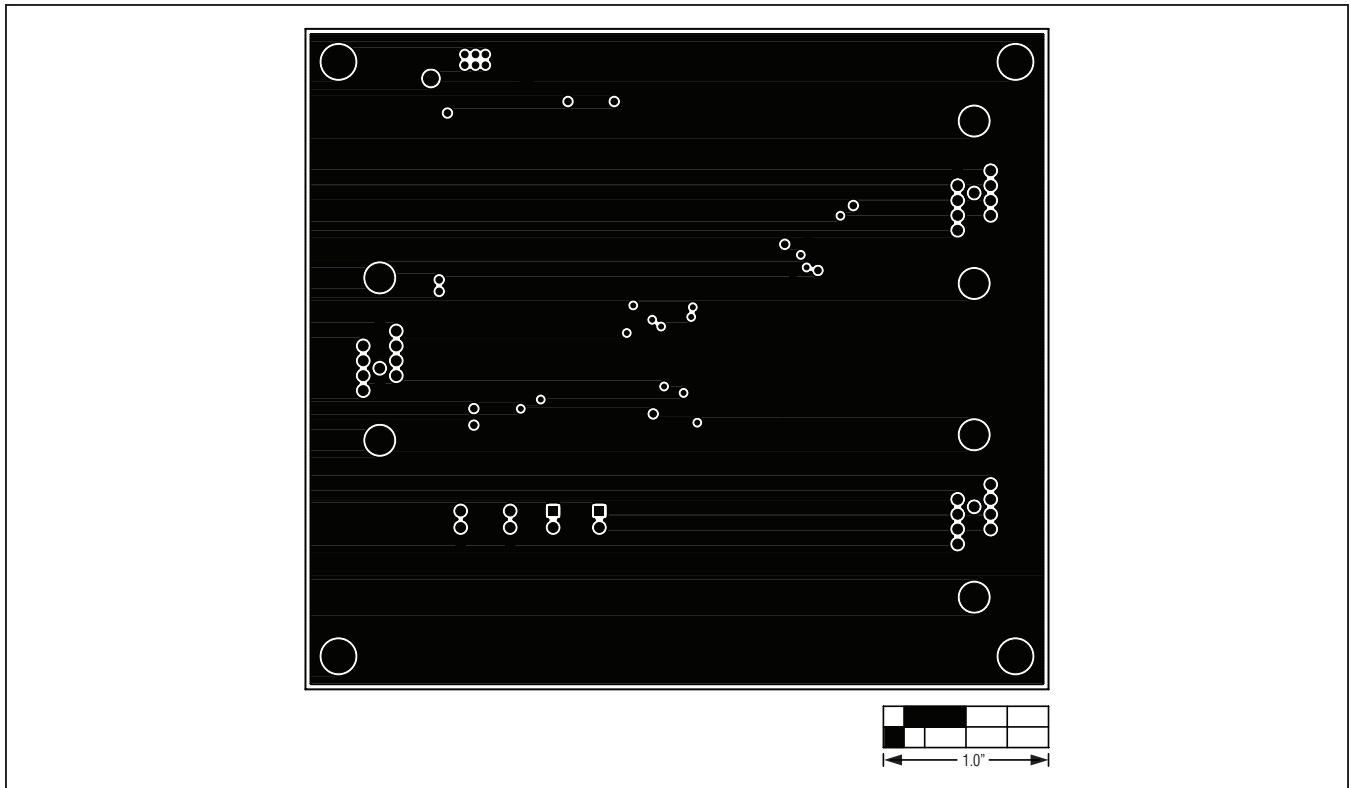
MAX14983E EV Kit PCB Layout—GND Layer 2
